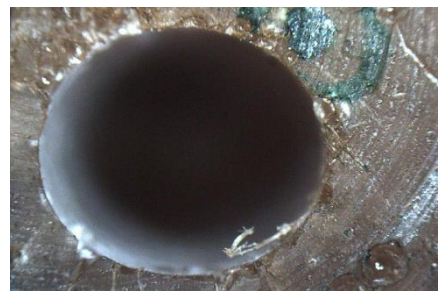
Machine Vision Image of Drilled Hole of the Hybrid Composite Specimen with 20 wt% &15cm
